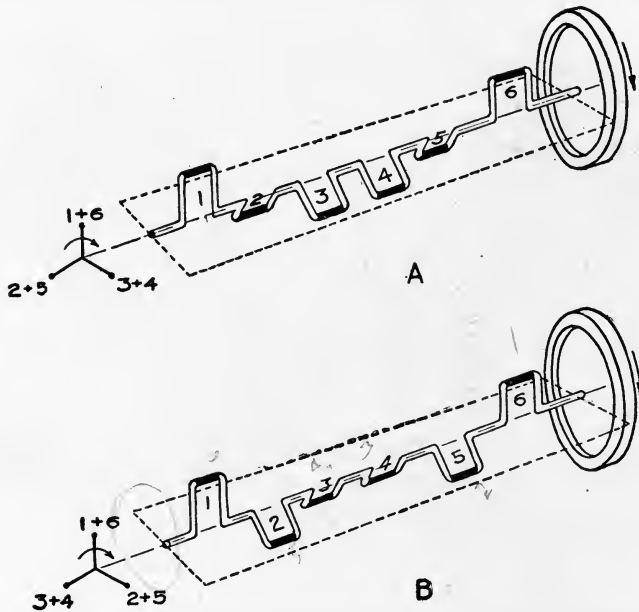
Methods of crank arrangement for six-cylinder engine.
